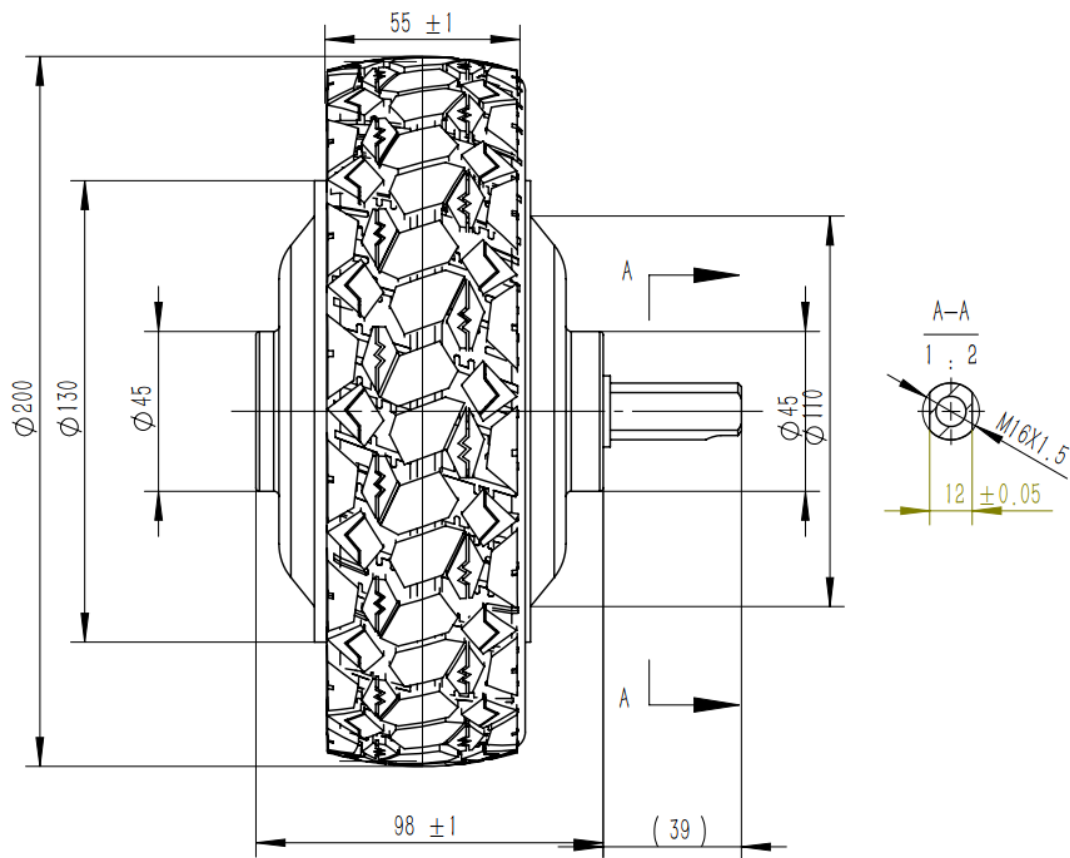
8 inch 13Nm/15Nm rubber-coated tire hub motor mounting size
